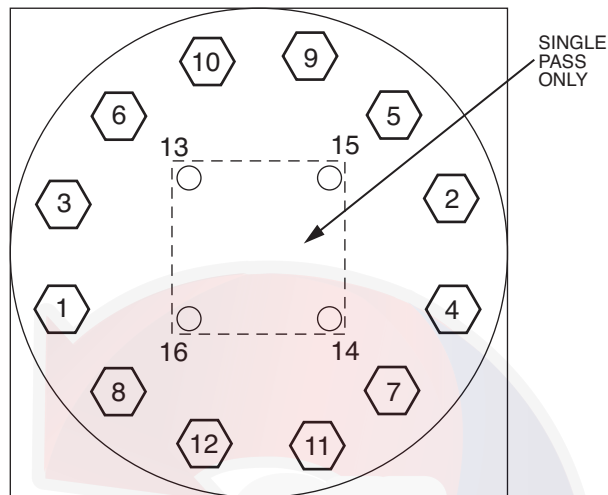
Flooded Cooler Unit Head Recommended Bolt Torque Sequence
